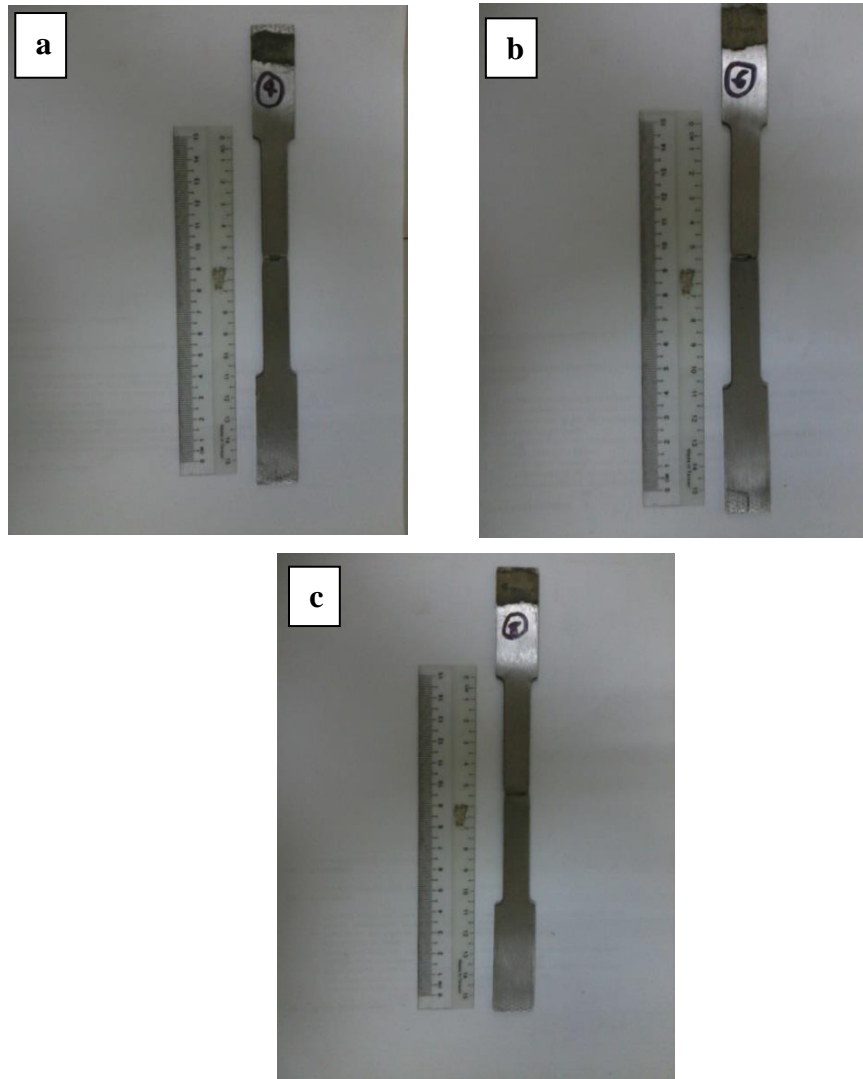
Specimen Condition for different crack size a) 4mm crack size b) 6mm crack size c) 8mm crack size
